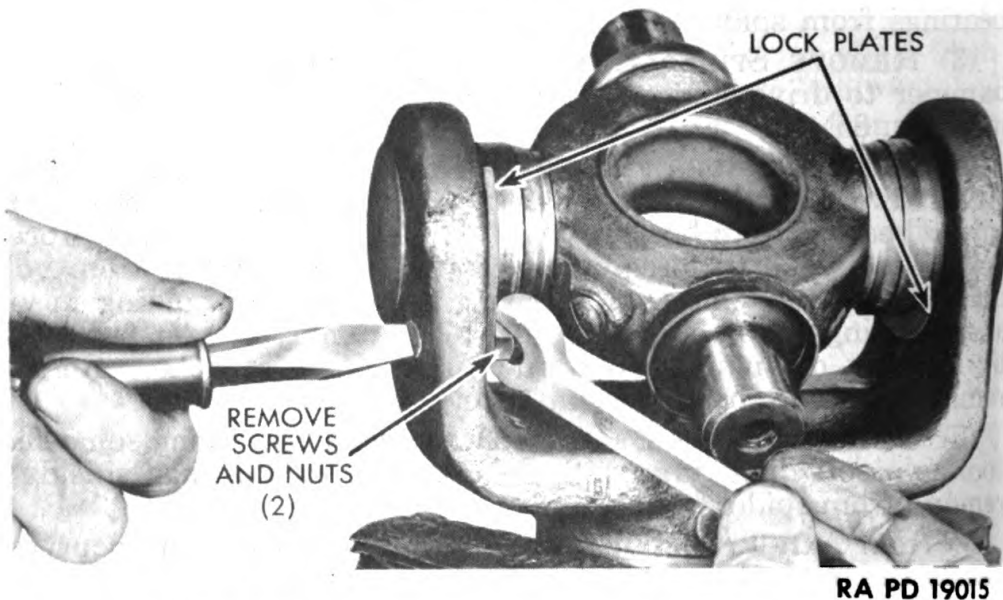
Removing Trunnion Bearing Lock Plate Bolt
